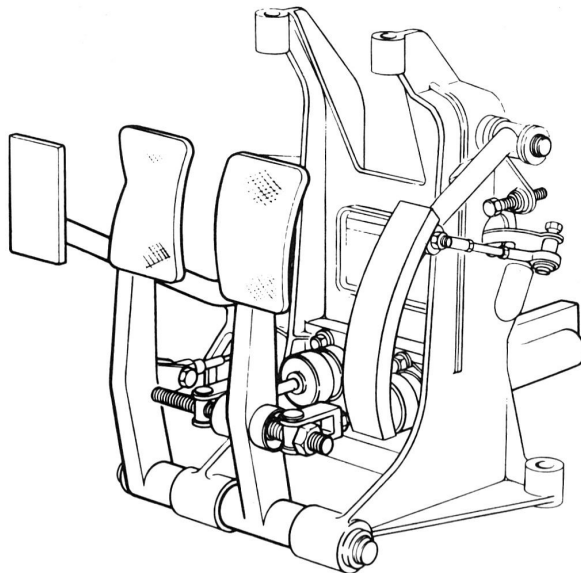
Mark II pedal support bracket and brake master cylinder assembly
